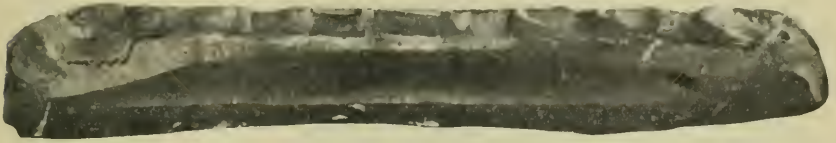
Closeup of the break in the part which went through the casing. A progressive fracture is clearly visible here, but it was so hidden before the accident that no inspection procedure short of taking out the blades could have led to its discovery.
